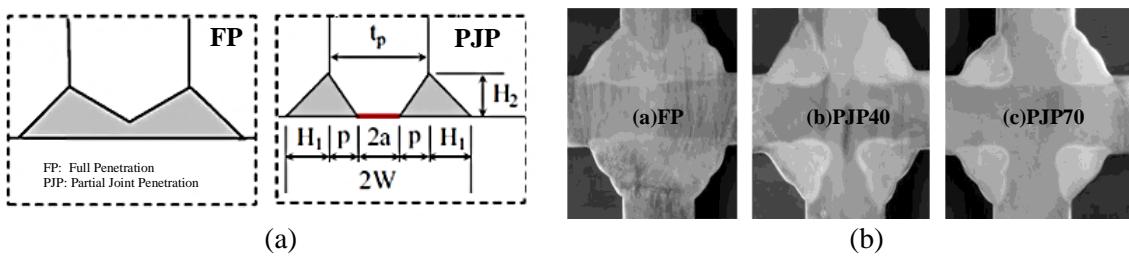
Illustration and CSV of welded specimens; (a) detail of welded part, (b) macrographs of specimens [15]
